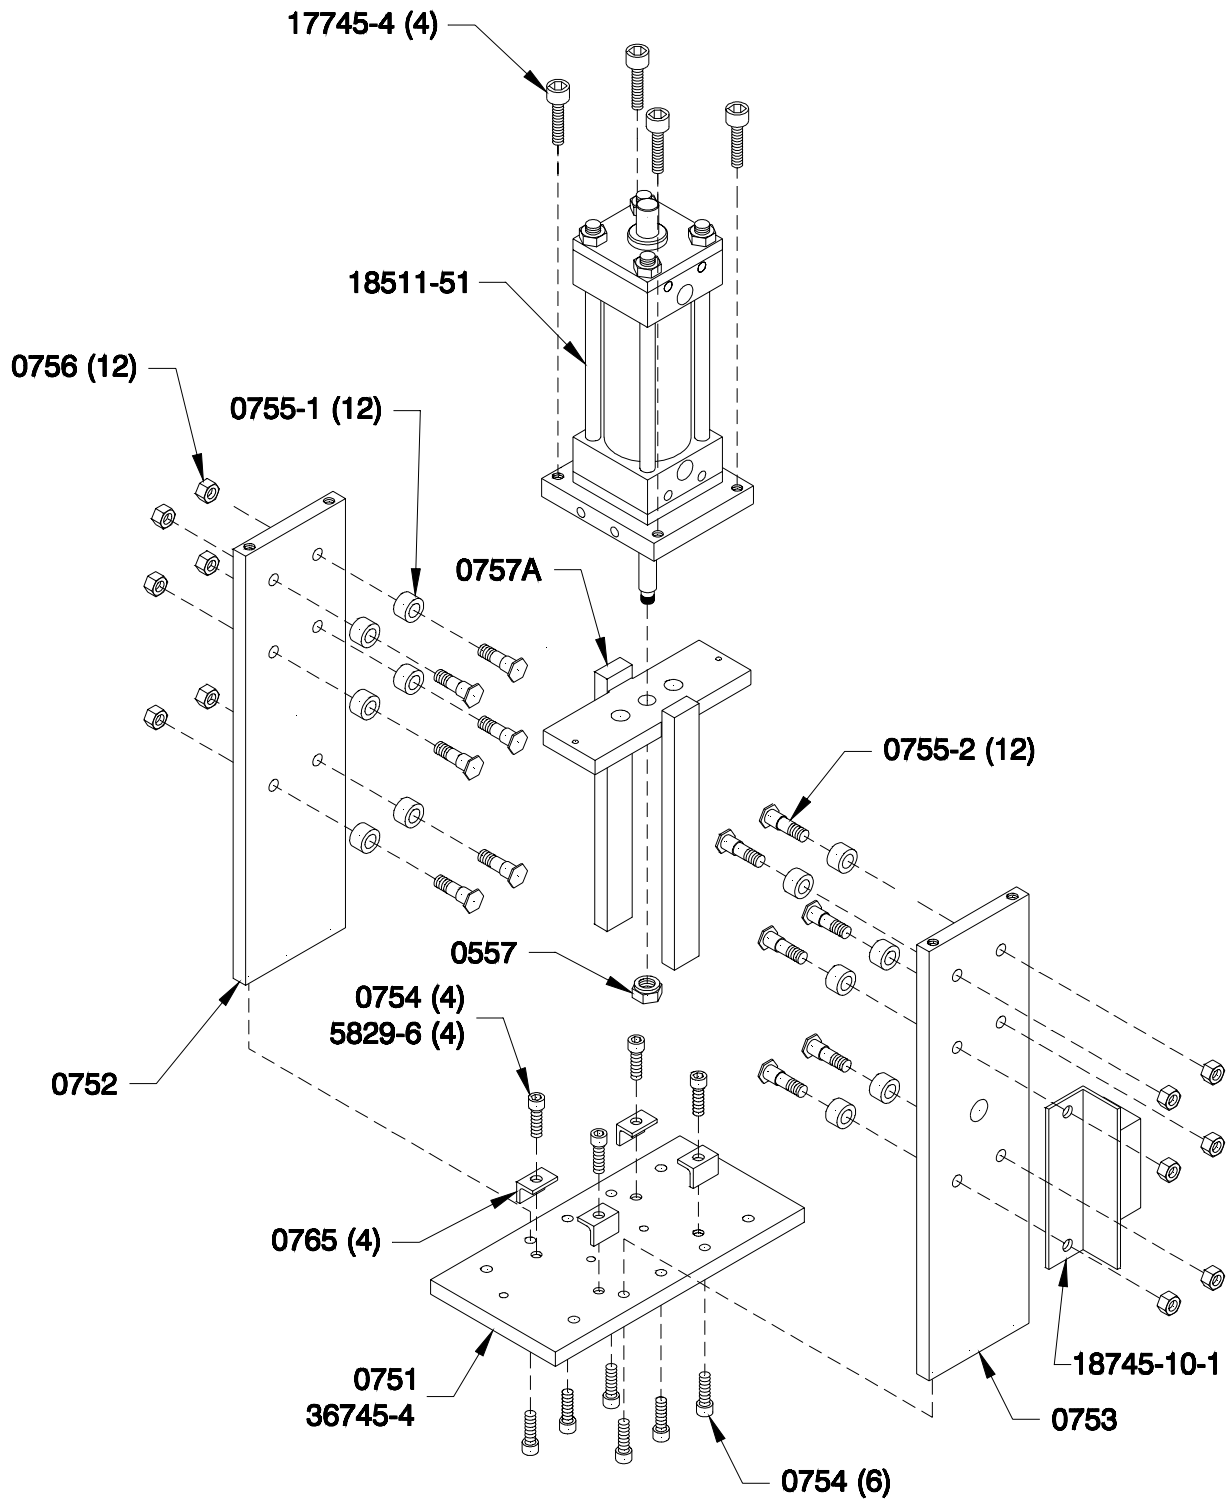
Hydraulic Motor Assembly, (Part No. 18745, 23745), Exploded View
